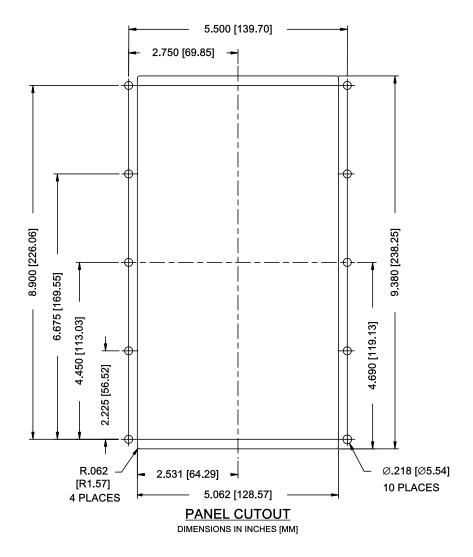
, TC - Bezel-Mounted Cutout and Drill Dimensions
